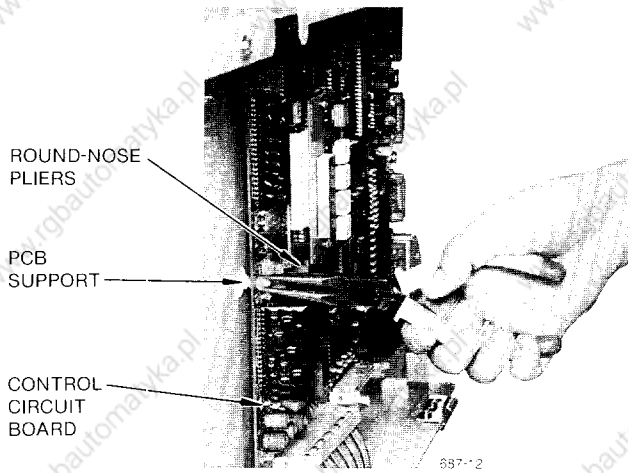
Holding Head of PCB Support with Round-nose Pliers
